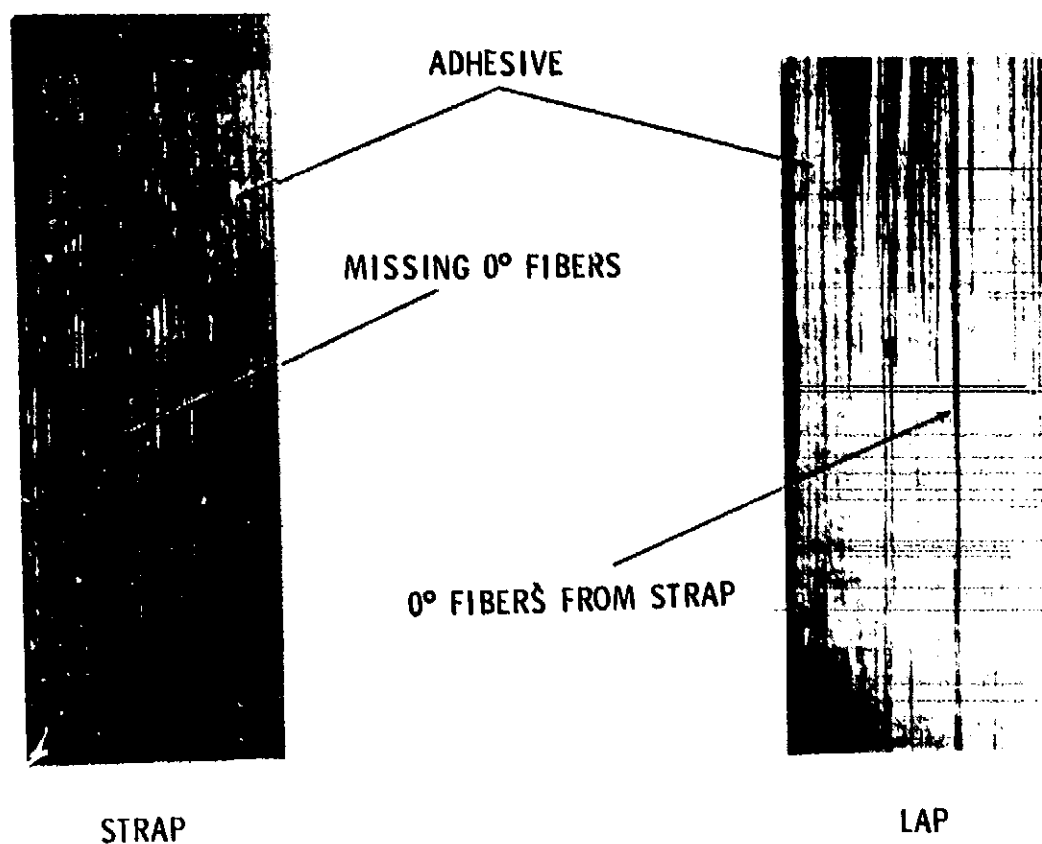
Debonded surfaces of cracked-lap-shear specimen (FM-300, thin strap).
